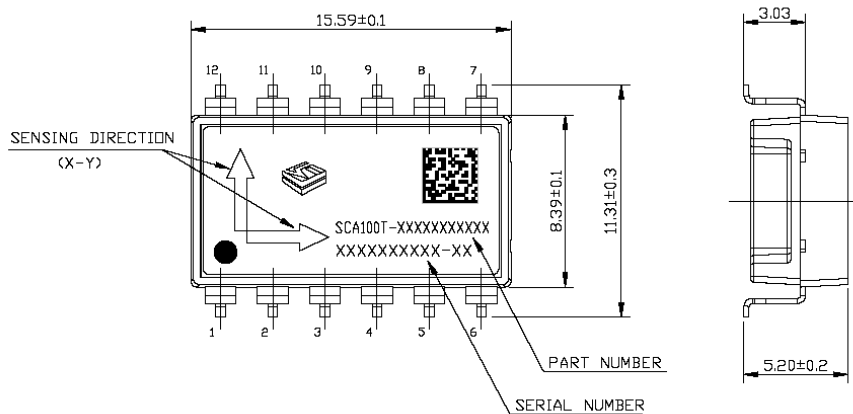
Mechanical dimensions of the SCA100T (Dimensions in mm)
